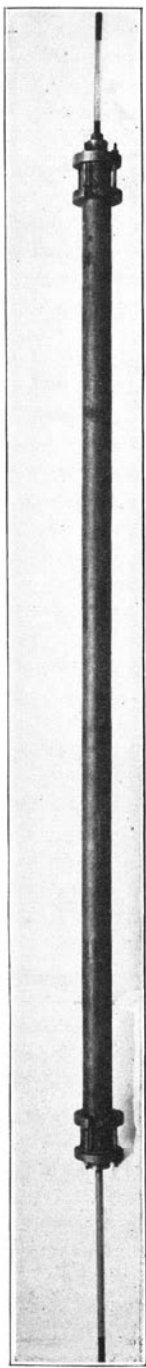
TUBE WITH END STOPPED AND WITH STAY RODS, READY TO BE PUT INTO CYLINDER FOR TEST
